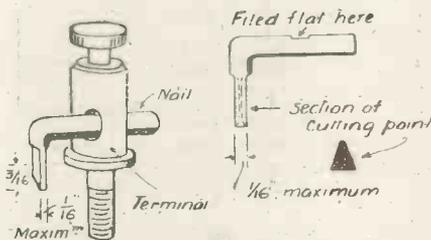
Improved Fin-drill for making holes for valve windows.
